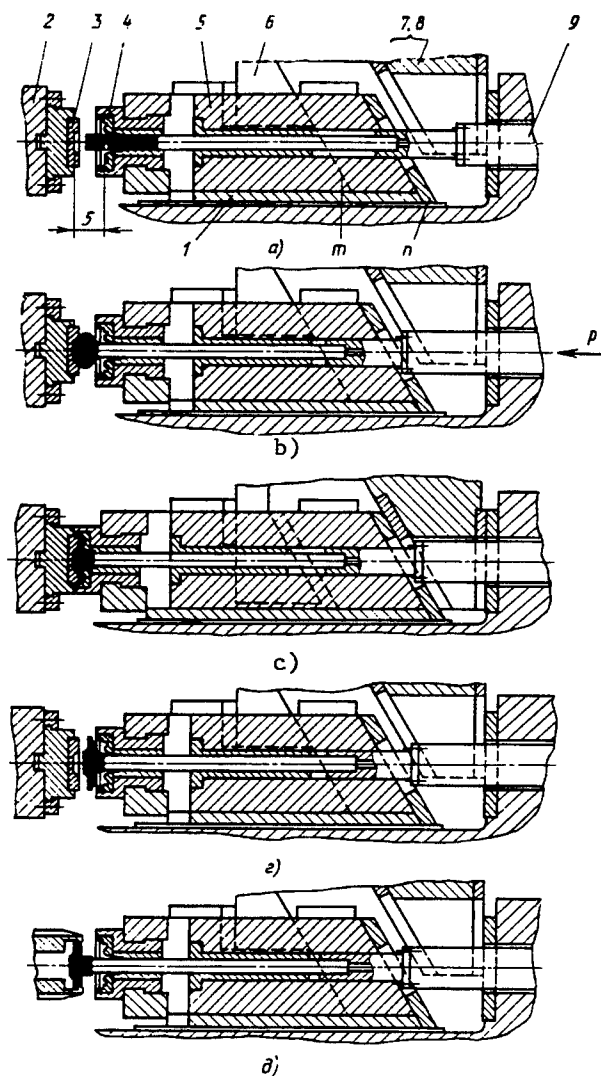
Characteristic Stages in Shape Change of Blank During Stamping of Half-Axle Flange (Heated Portion Shown Black)
